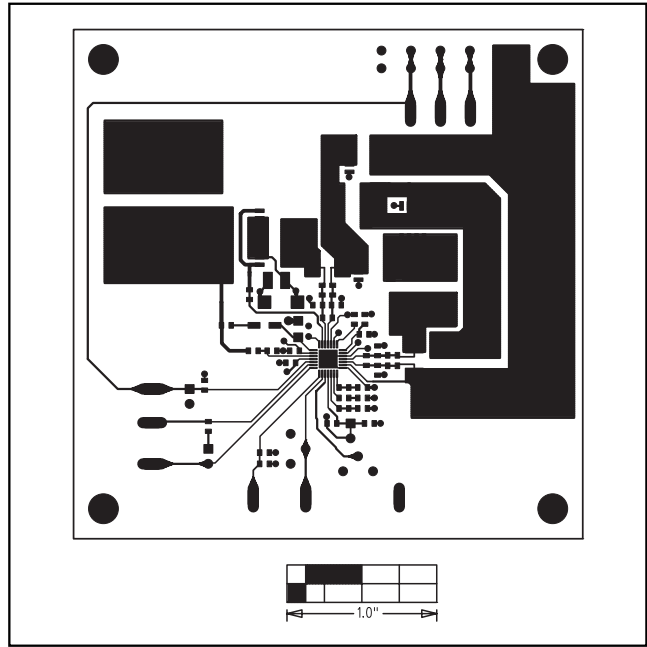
MAX8725 EV Kit PC Board Layout—Component Side
